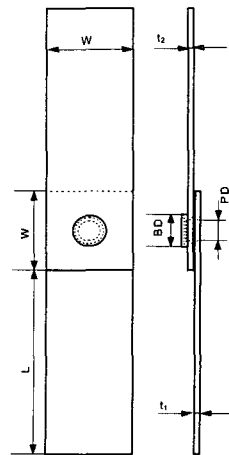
Configuration of tensile - shear specimen for static and fatigue test
